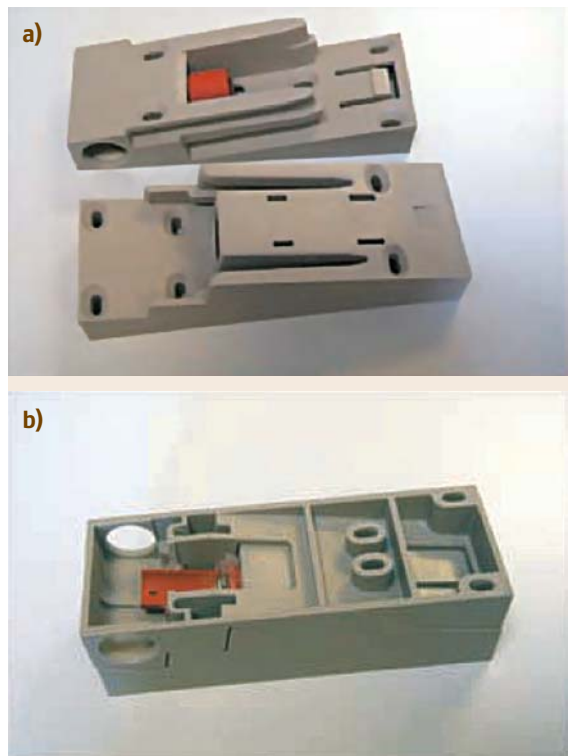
,b A piping and electrical drop-in connector shown (a) disassembled and (b) assembled
